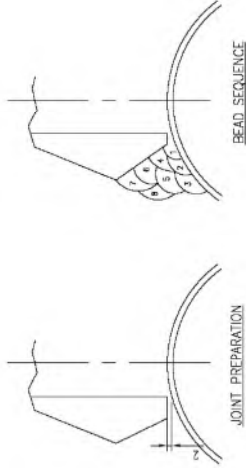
Alignment and welding practices for branch nozzle with O-let fitting
